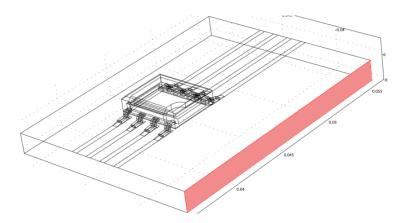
The mechanical constraint applied to the assembly: the board is fixed on the highlighted surface.
